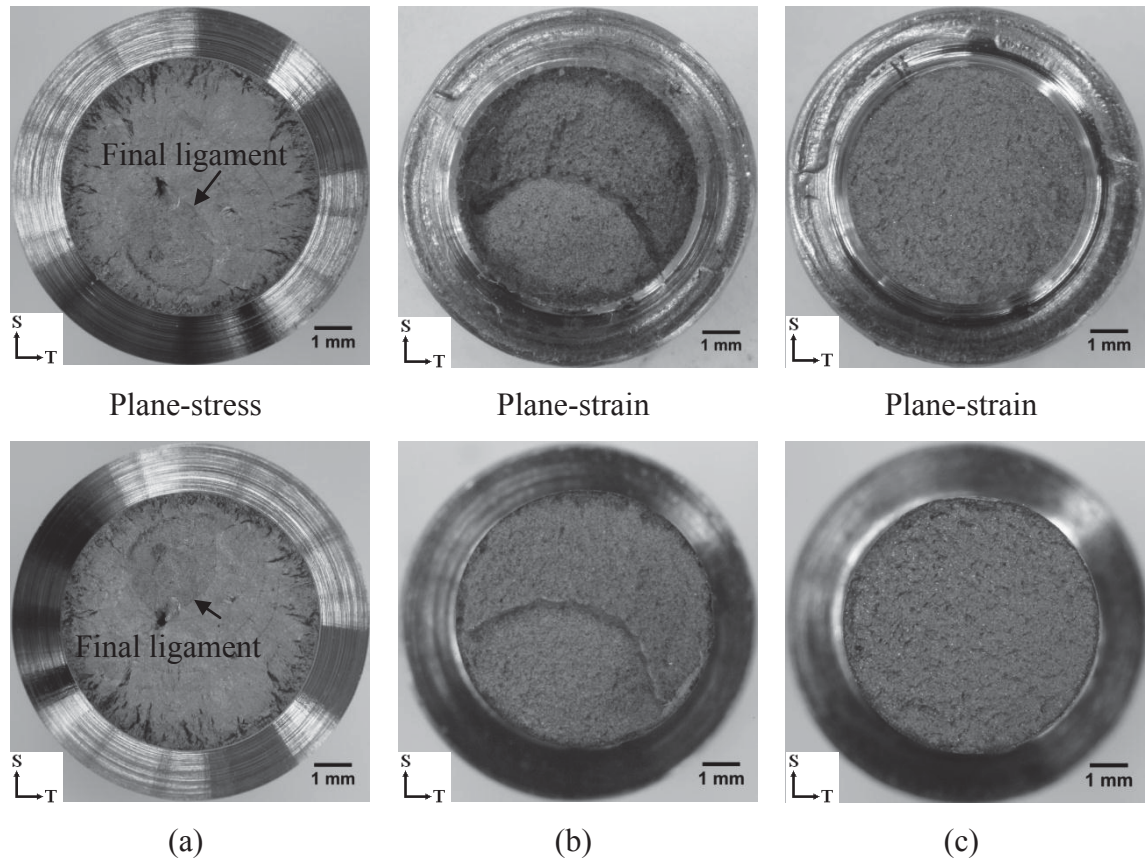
Circumferential notch tension test fracture surface for the (a) TC4, (b) TC4/TiB, TiC/2.5w, 2.5p and (c) TC4/TiB, TiC/5w, 5p. The top and bottom fractographs for each column are the matching fracture halves for each specimen.
